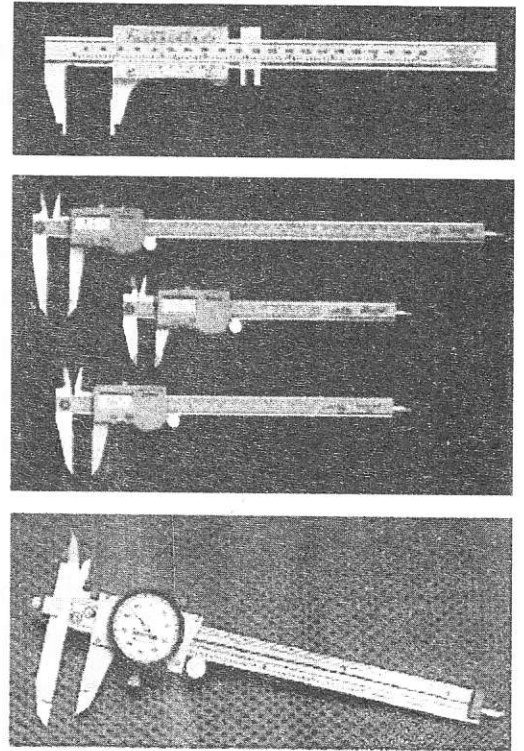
Electronic and Dial Indicator Slide Calipers
